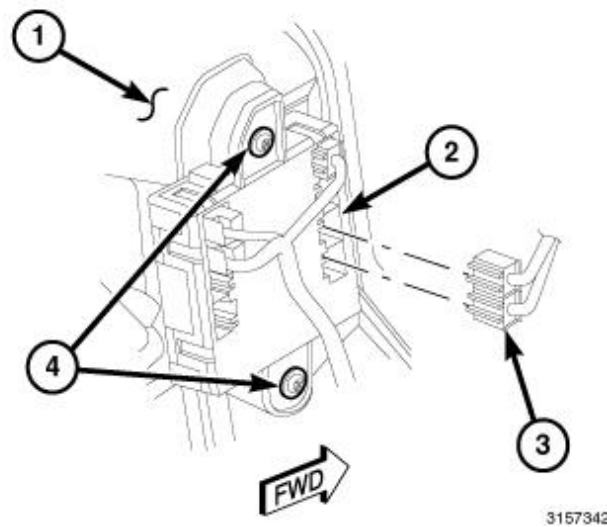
Electrical Connectors, Door Control Module, Screws & Module Carrier
